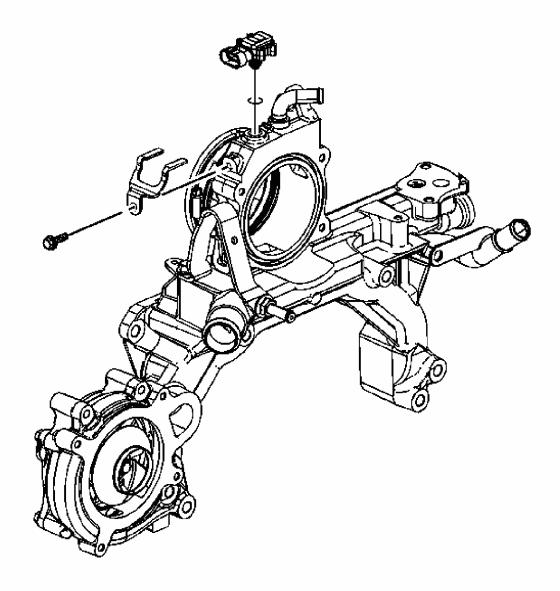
Identifying MAP Sensor Bracket & Bolt Courtesy of GENERAL MOTORS CORP.
